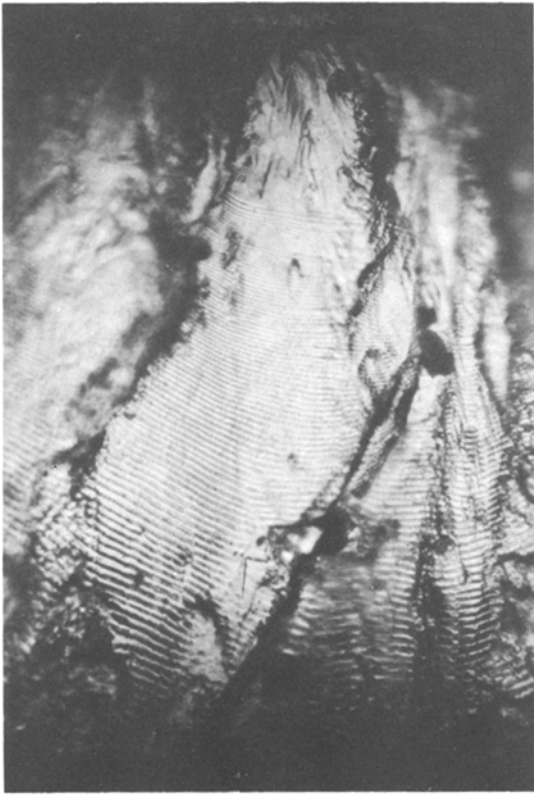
Programme markings outlining the front of expanding cracks (optical fractographs) 7010 aluminium alloy. Various fatigue origins arrowed A. Magnification $\times 528$.
